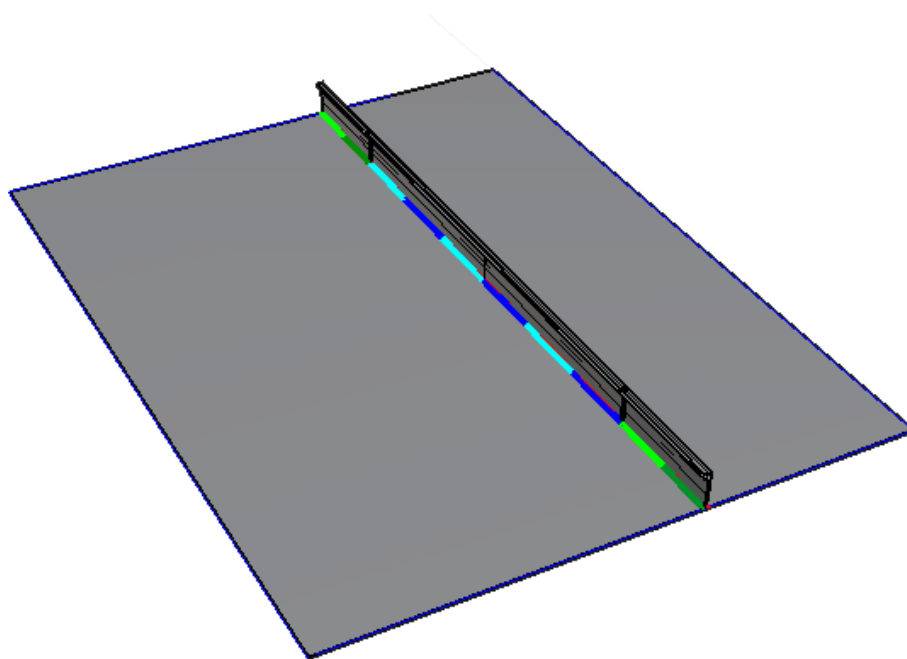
Weld beads of W3, W4, W5 and W6 welding lines
